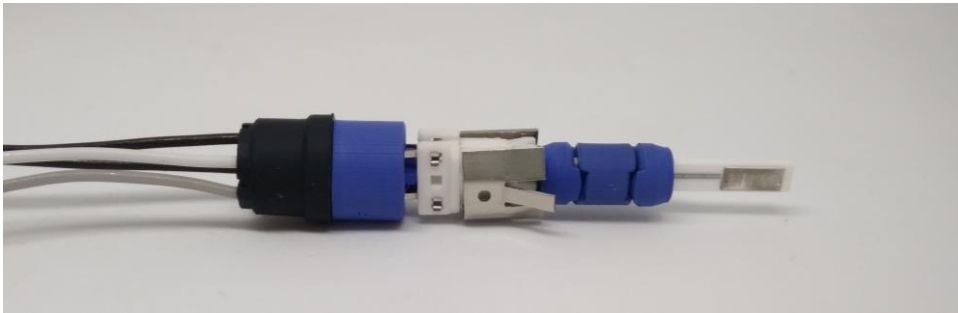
Examples of the printed parts used for the redesign of the ceramic components of the lambda sensor.
